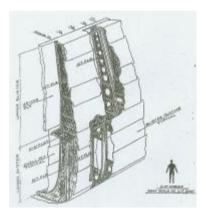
Isometric Drawing of External Blister Tankage (Sheet No. 1, Inner Bottom Tank Soundings 5-2009; TPWD Project No. 101901, 2009)
